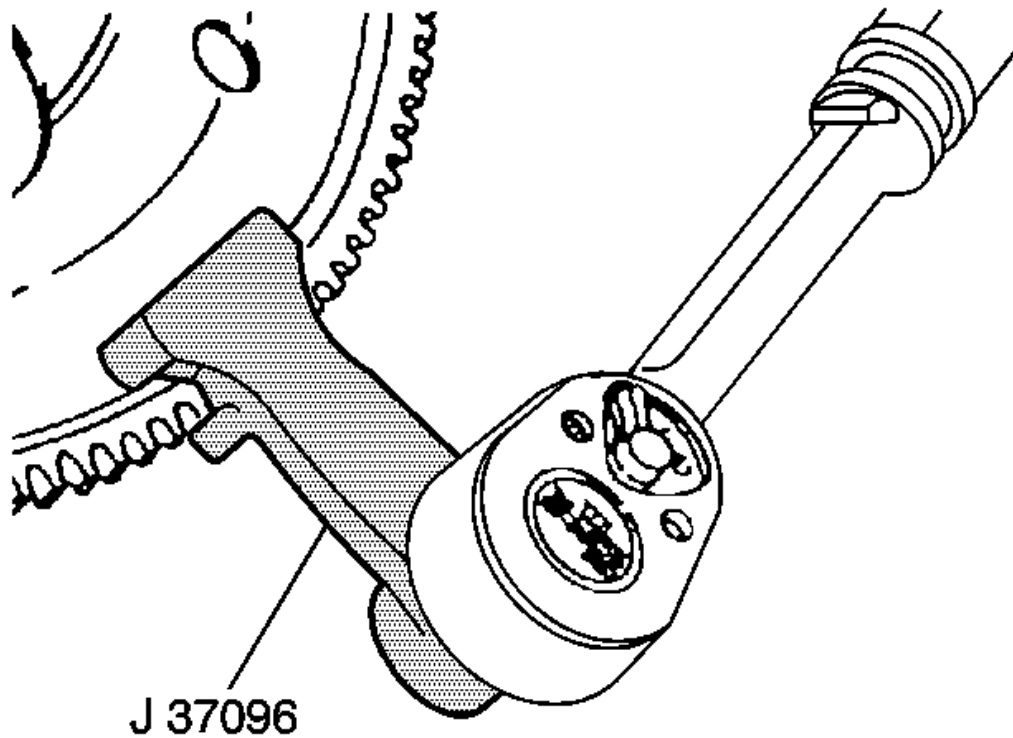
View Of Flywheel & Flywheel Holder (J 37096)
